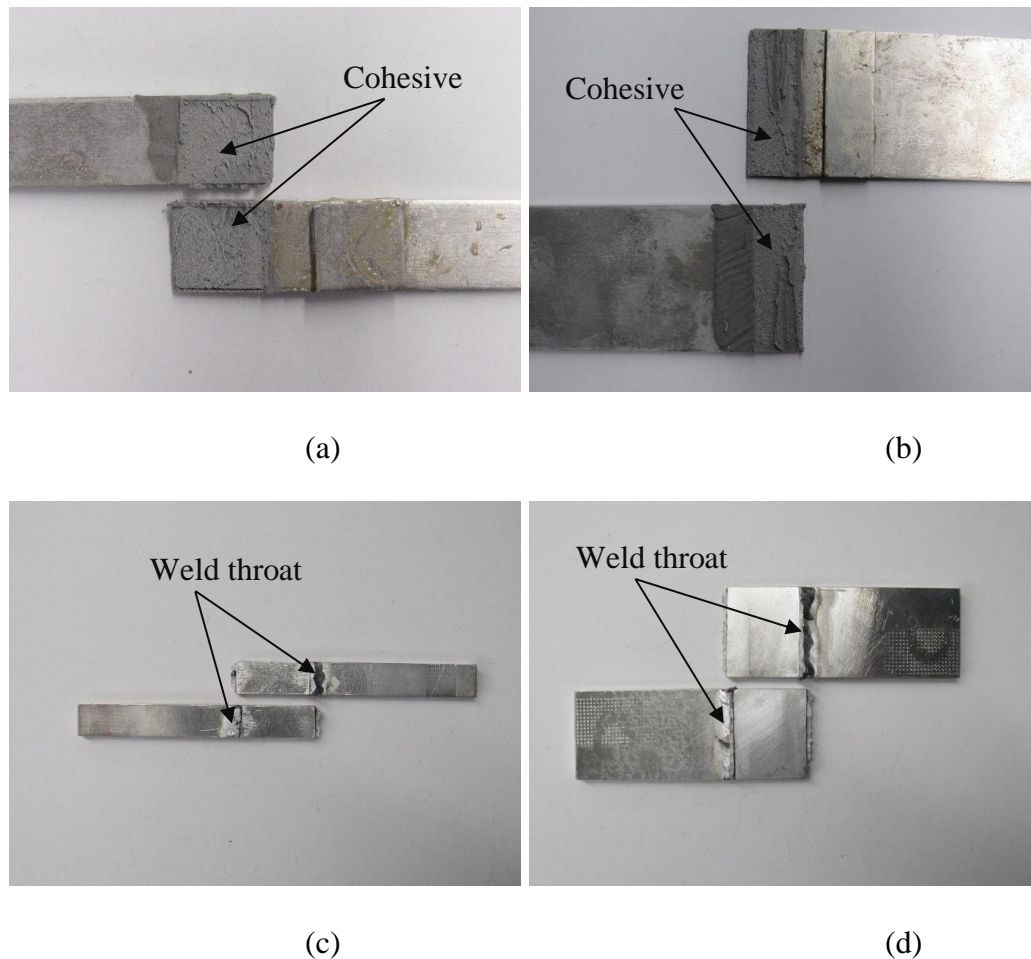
Representative failure modes of shear specimens (a) adhesive with 13 mm width, (b) adhesive with 38 mm width, (c) welded with 13 mm width, and (d) welded with 38 mm width
